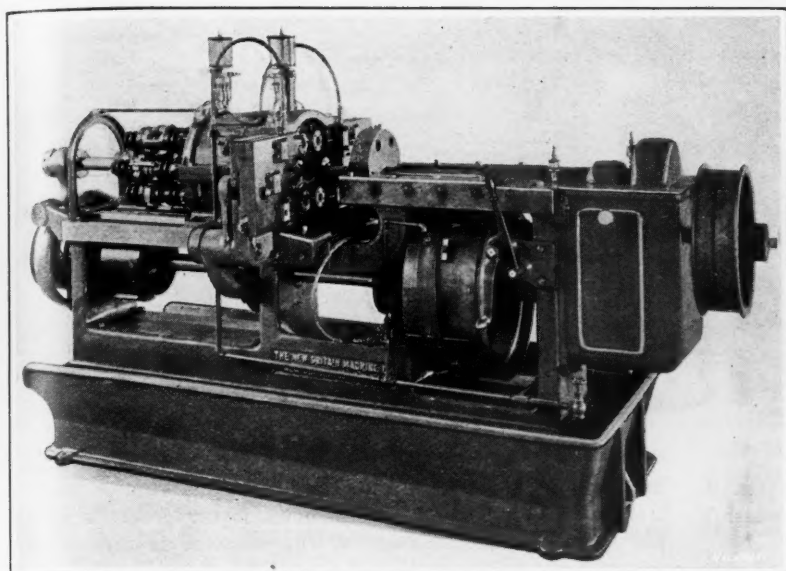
Front View of New Britain Sextuple-spindle Automatic Bar Machine
